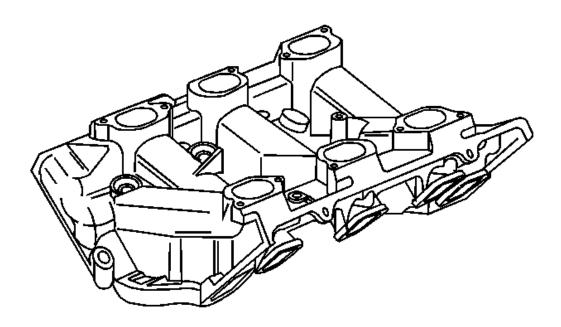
Lower Intake Manifold Courtesy of GENERAL MOTORS CORP.
